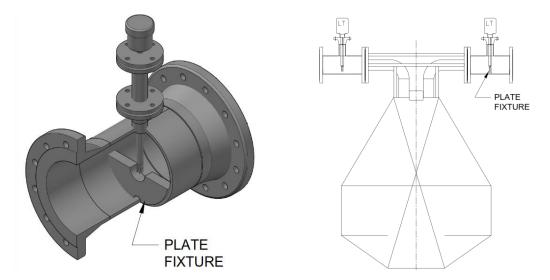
Plate fixtures can be used to prevent partially filled pipes (left) and installation location of the plate fixture with a mass flow meter (right)
